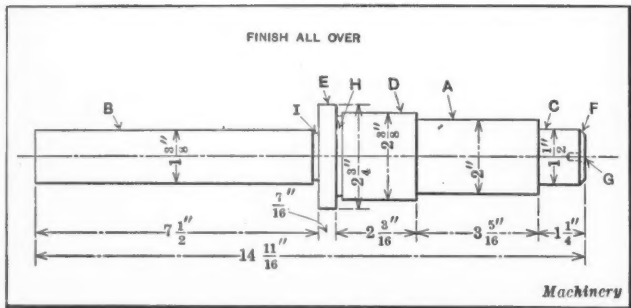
Dimensioned Drawing of Stud machined from Bar Stock
